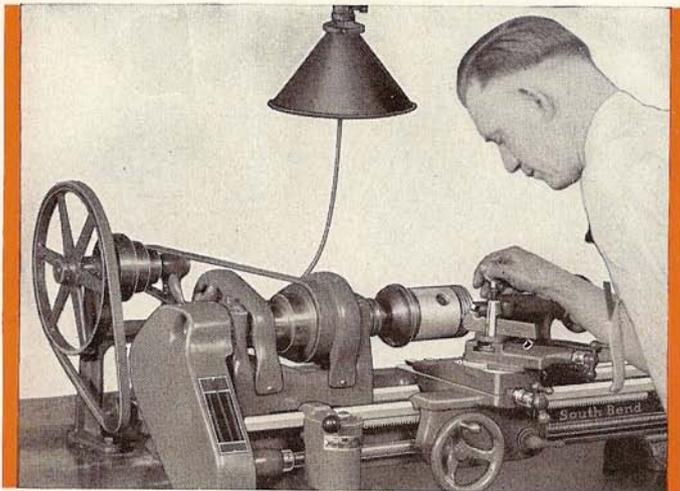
Finishing a Semi-Machined Piston in the "Workshop" Lathe.
